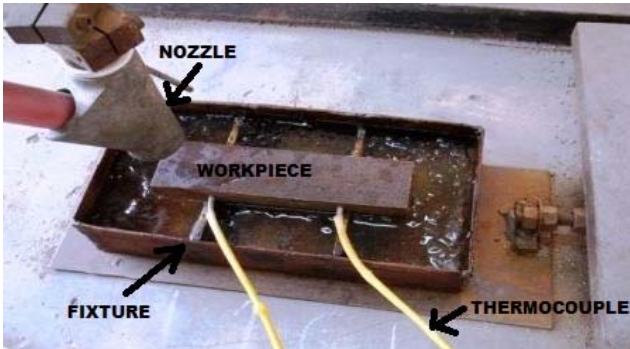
Fixture (full of ice below work piece) arrangement before welding.
